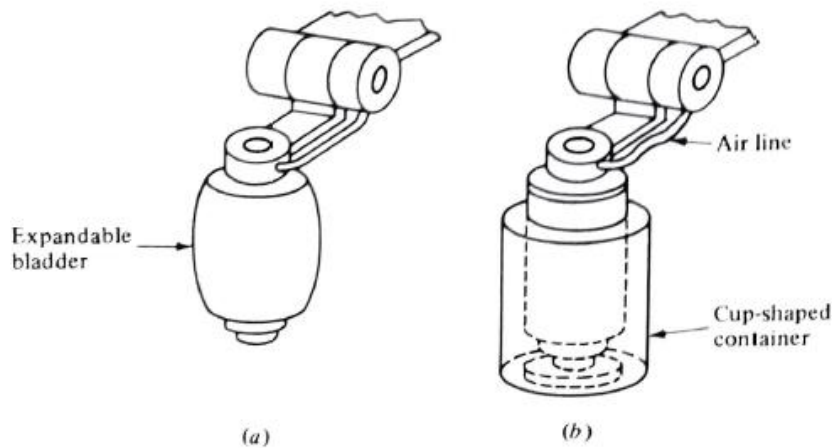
Expansion bladder used to grasp inside of a cup-shaped container.
